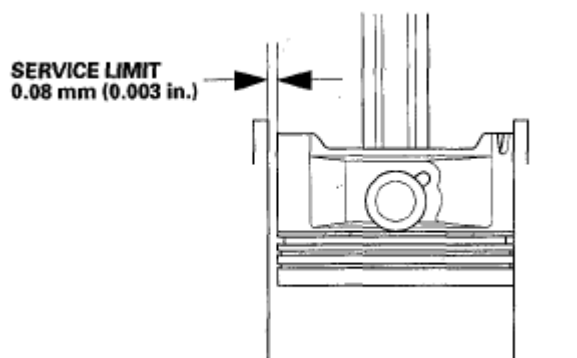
Identifying Clearance Between Cylinder Bore Diameter And Piston Diameter
